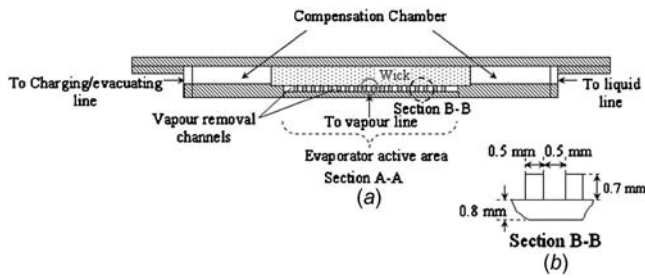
mLHP Evaporator. (a) Cross-sectional details of the mLHP evaporator. (b) Sectional view of vapor removal channels.
